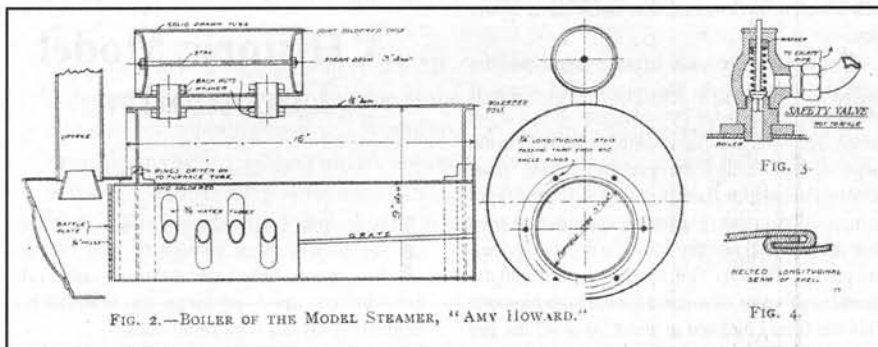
Boiler Of The Model Steamer, "Amy Howard"
